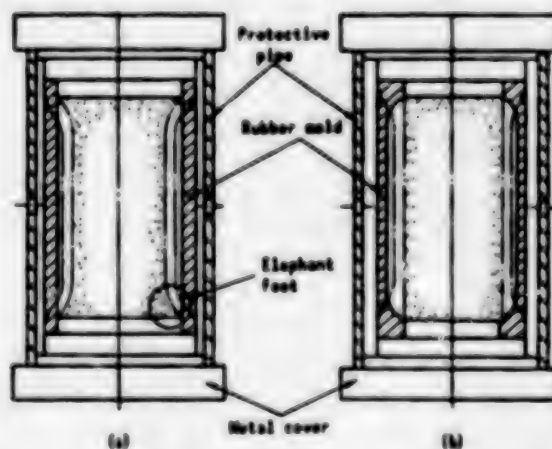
Examples of "Elephant Foot" Appearing in Straight Cylindrical Rubber Mold (a), and Rubber Mold (b) To Improve (a)
